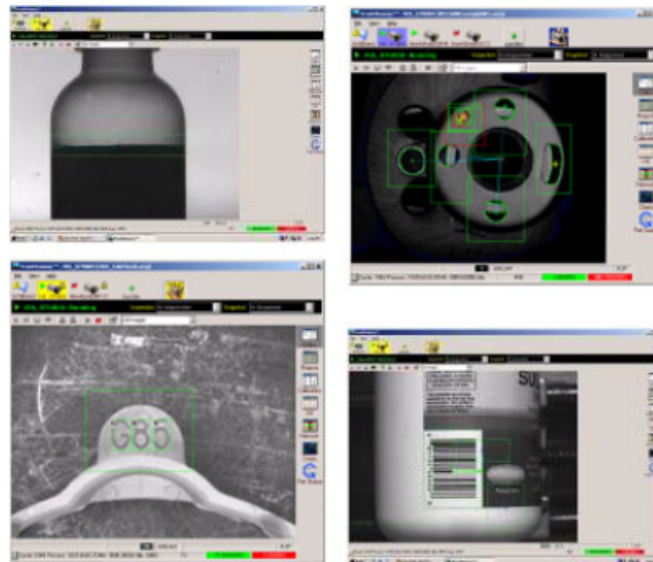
Examples of a machine vision application for inspecting manufactured goods [120].
